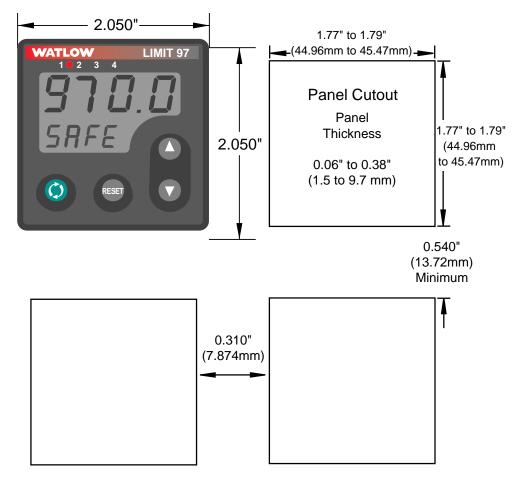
Series 97 multiple panel cutout dimensions.
